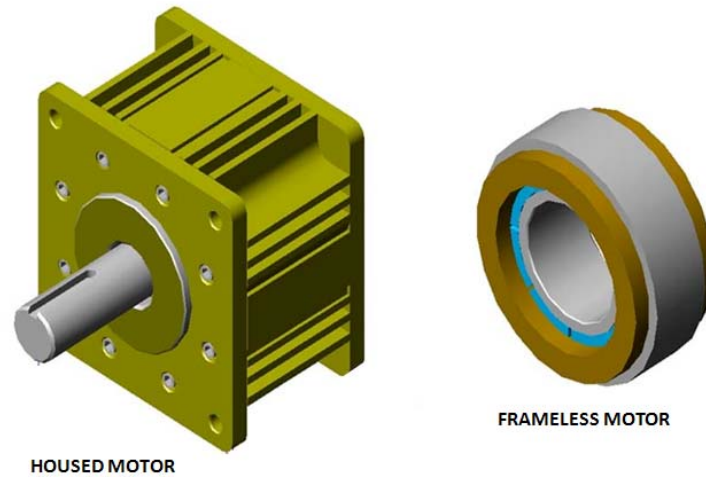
Illustration of a housed motor and a frameless motor (From [46])
